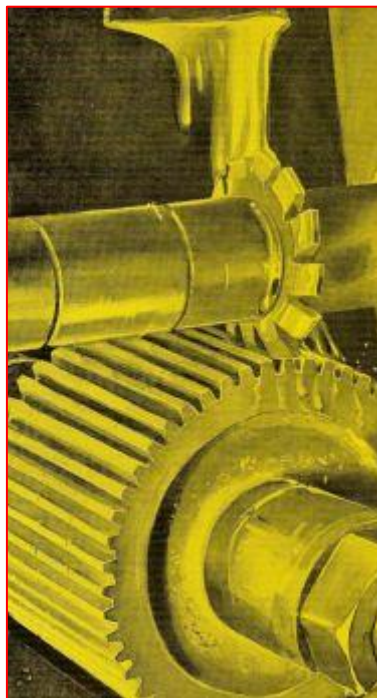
Direct cut of a gear with a gear milling cutter
